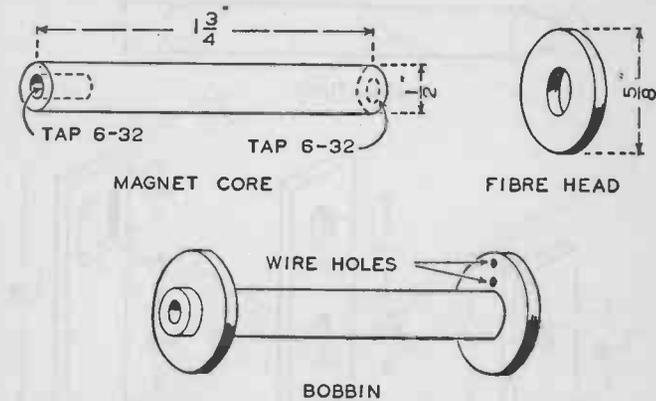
The core, magnet head and bobbin for the telegraph sounder.
